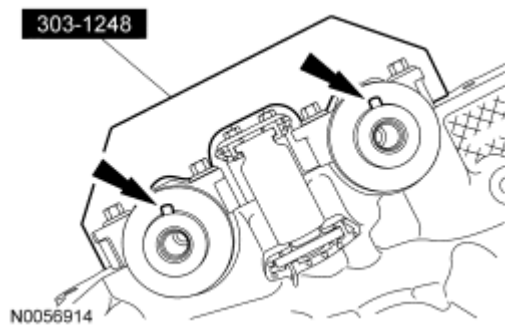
Installing Special Tool (303-1248) On Flats Of Camshafts
